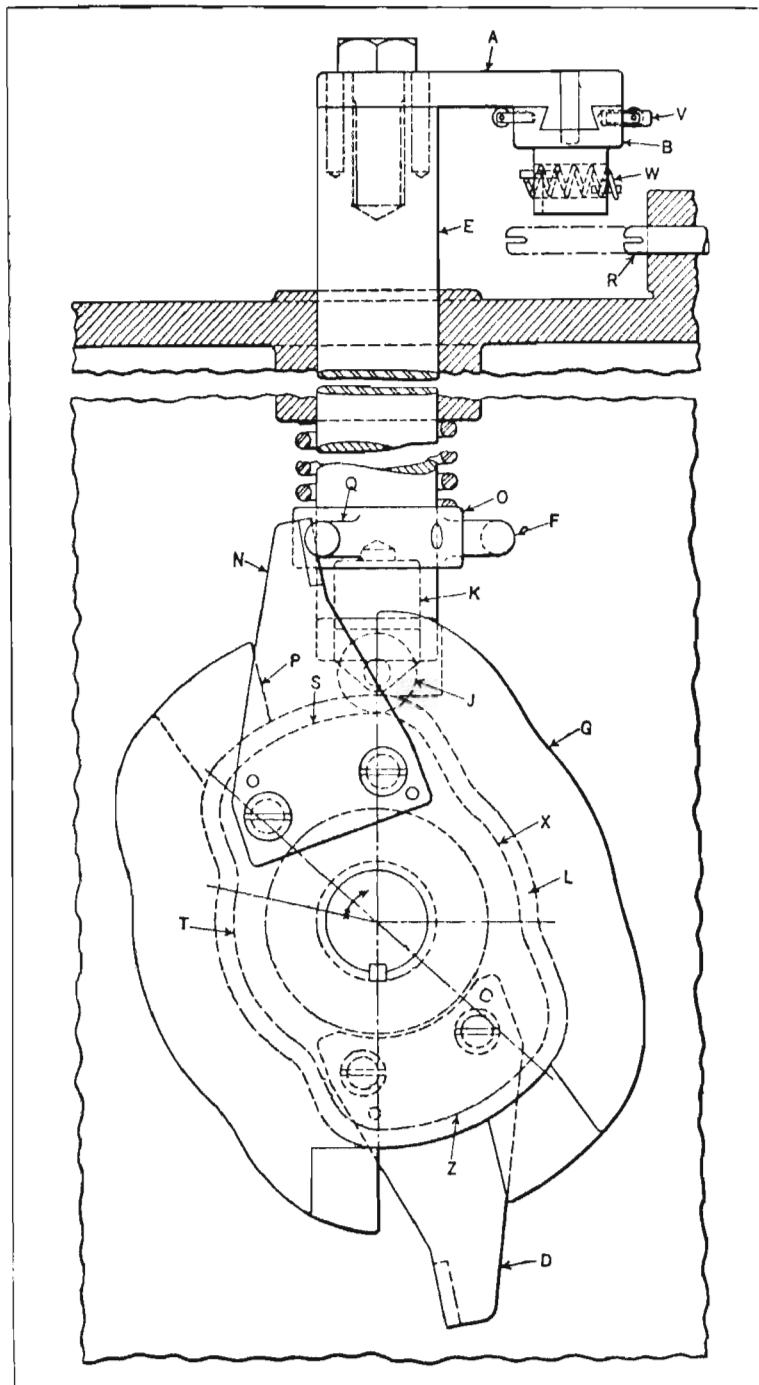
Cam Mechanism for Operating Transfer Arm of Spring-coiling Machine
